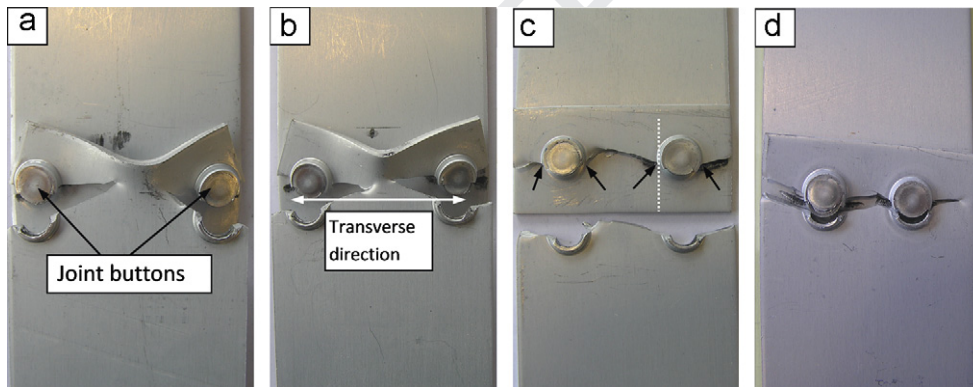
Lap shear fatigue fracture interfaces of specimens tested at low load amplitudes, 1.35 kN or 1.575 kN, for specimen with different edge distances: (a) 6 mm, (b) 8 mm, (c) 11.5 mm and (d) 14.5 mm.
